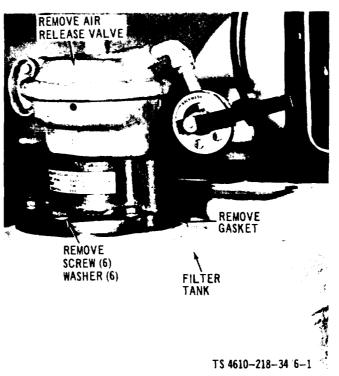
Diatomite Filter Air Release Valve, Removal and Installation
